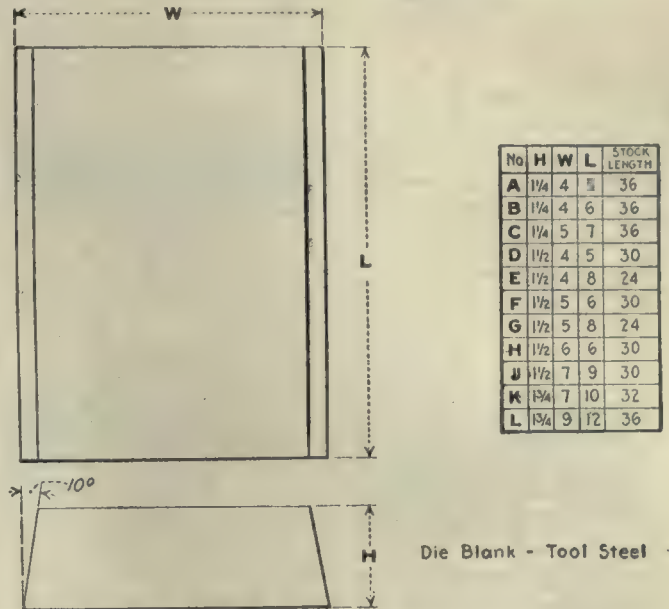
METHOD OF STANDARDIZING DIE BLANKS
